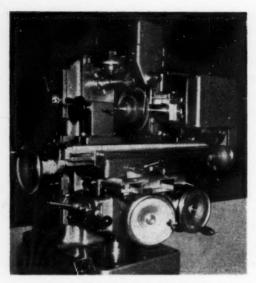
Rigiva horizontal mill with a hobbing attachment for spur and helical gears
